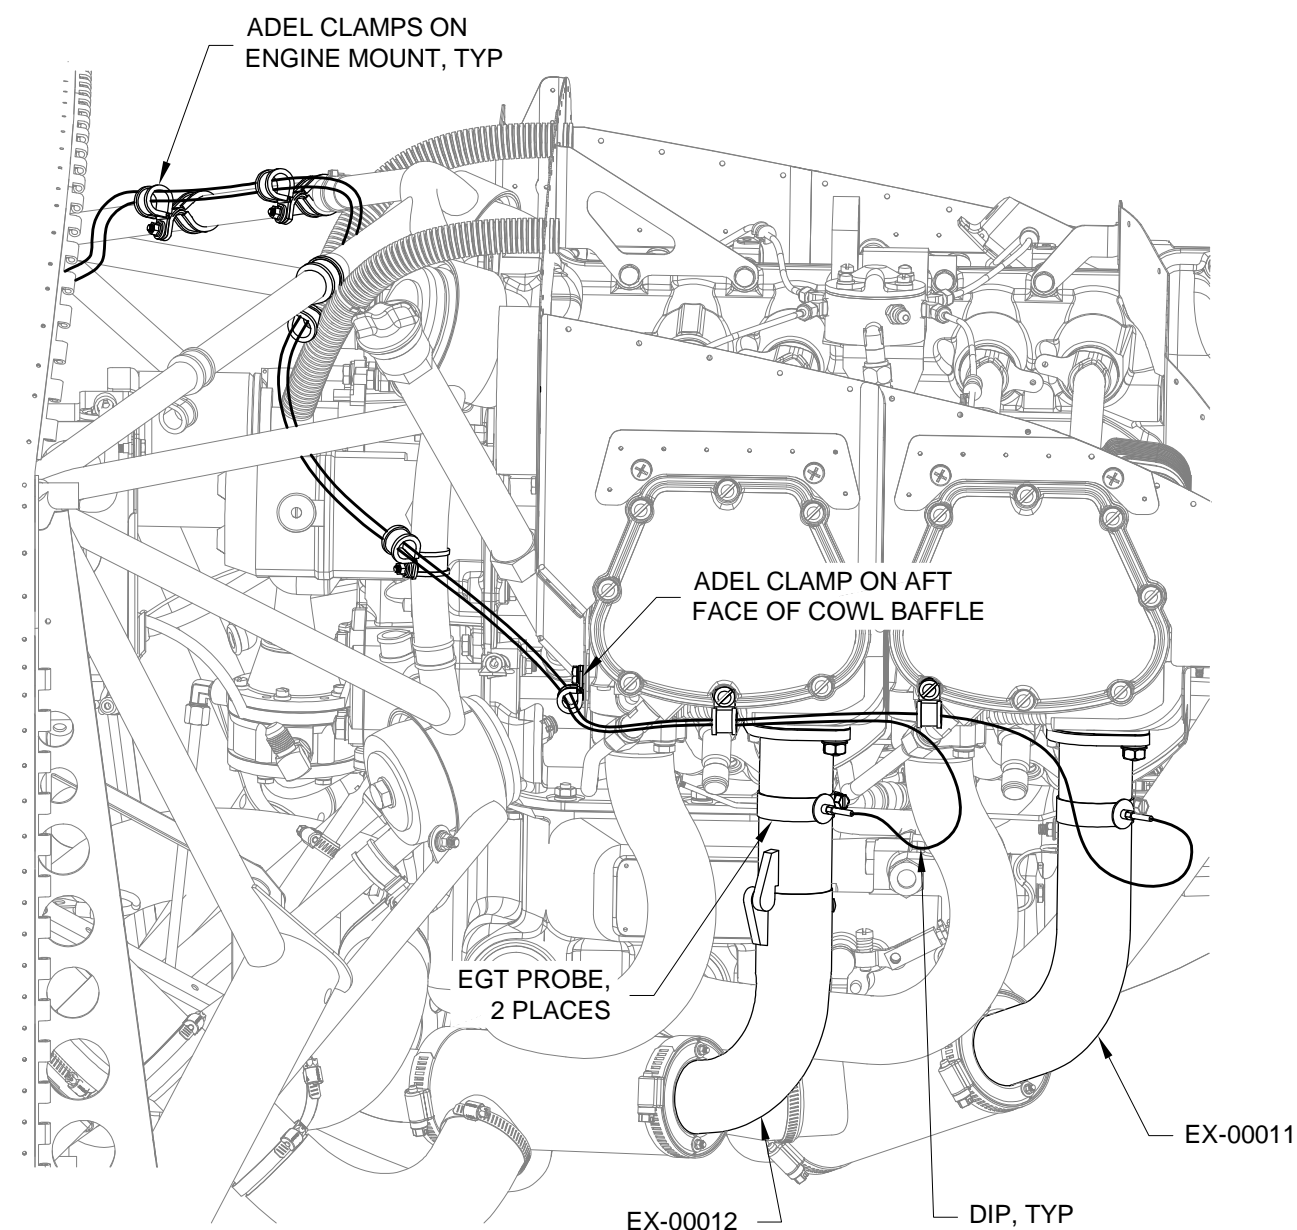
RIGHT SIDE EGT INSTALLATION
